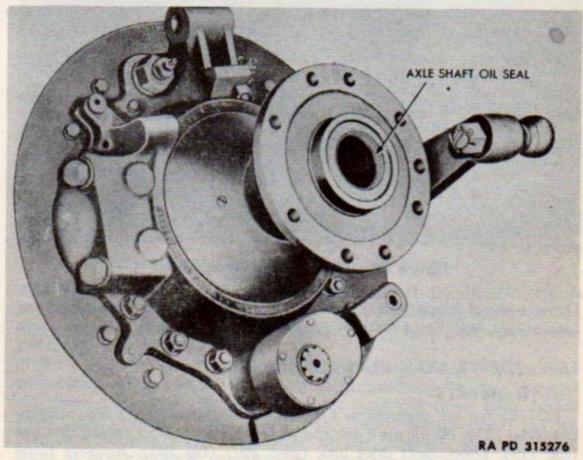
Front Axle Shaft Oil Seal Replacement 235
